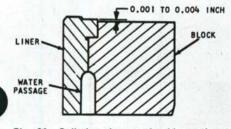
Cylinder sleeves should stand out 0.001-0.004 inch when properly installed. Refer to paragraph 26.
